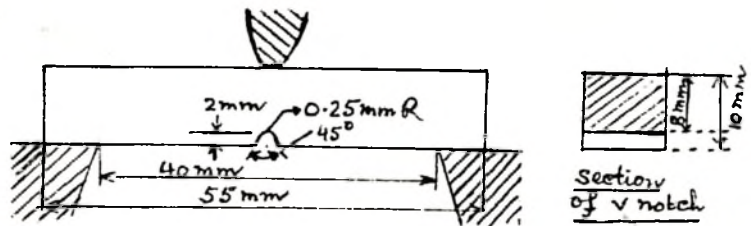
Details of Charpy 'V' notch Impact test specimen
